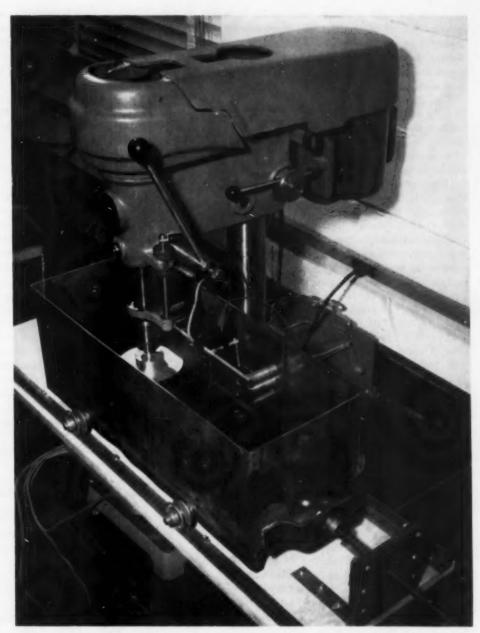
Spark-Cutting Equipment Used to Section Hard Materials
